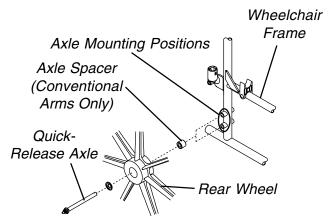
REMOVING THE EXISTING REAR WHEEL - QUICK-RELEASE AXLES
